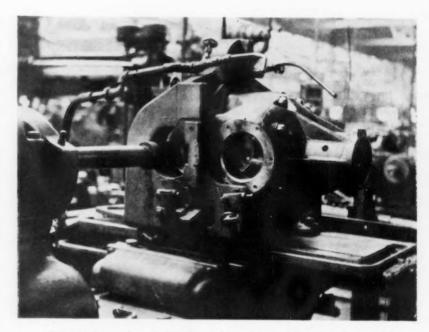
Set-up for grinding four holes in 5-ton axle housing. A special fixture of simple box design is employed.
